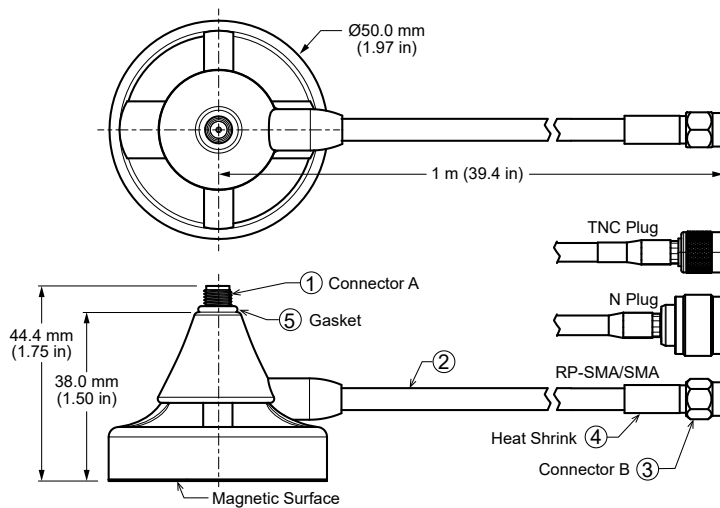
Product Dimensions for the ANT-MAG-RPSF-cccc-1 Cable Assembly
